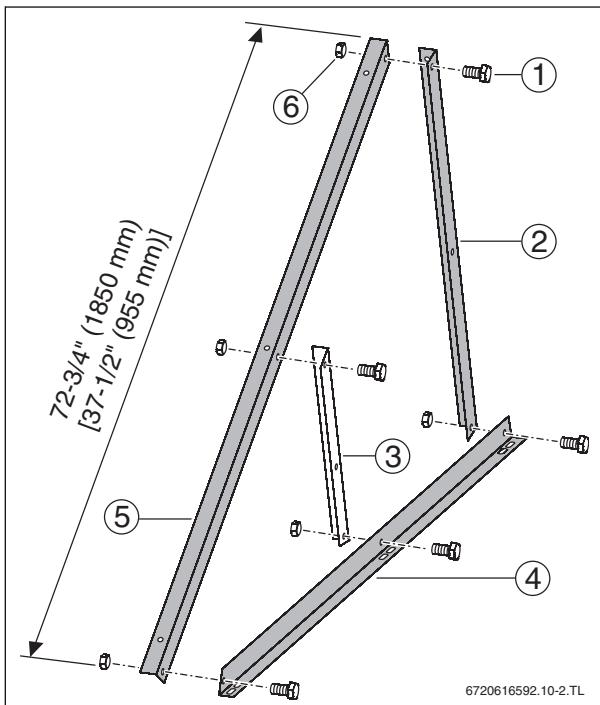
Assemble rails (dimension in brackets = horizontal installation)
